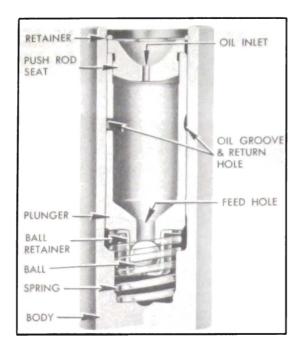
Hydraulic Valve Lifter, with Quarter Section Cut Out
